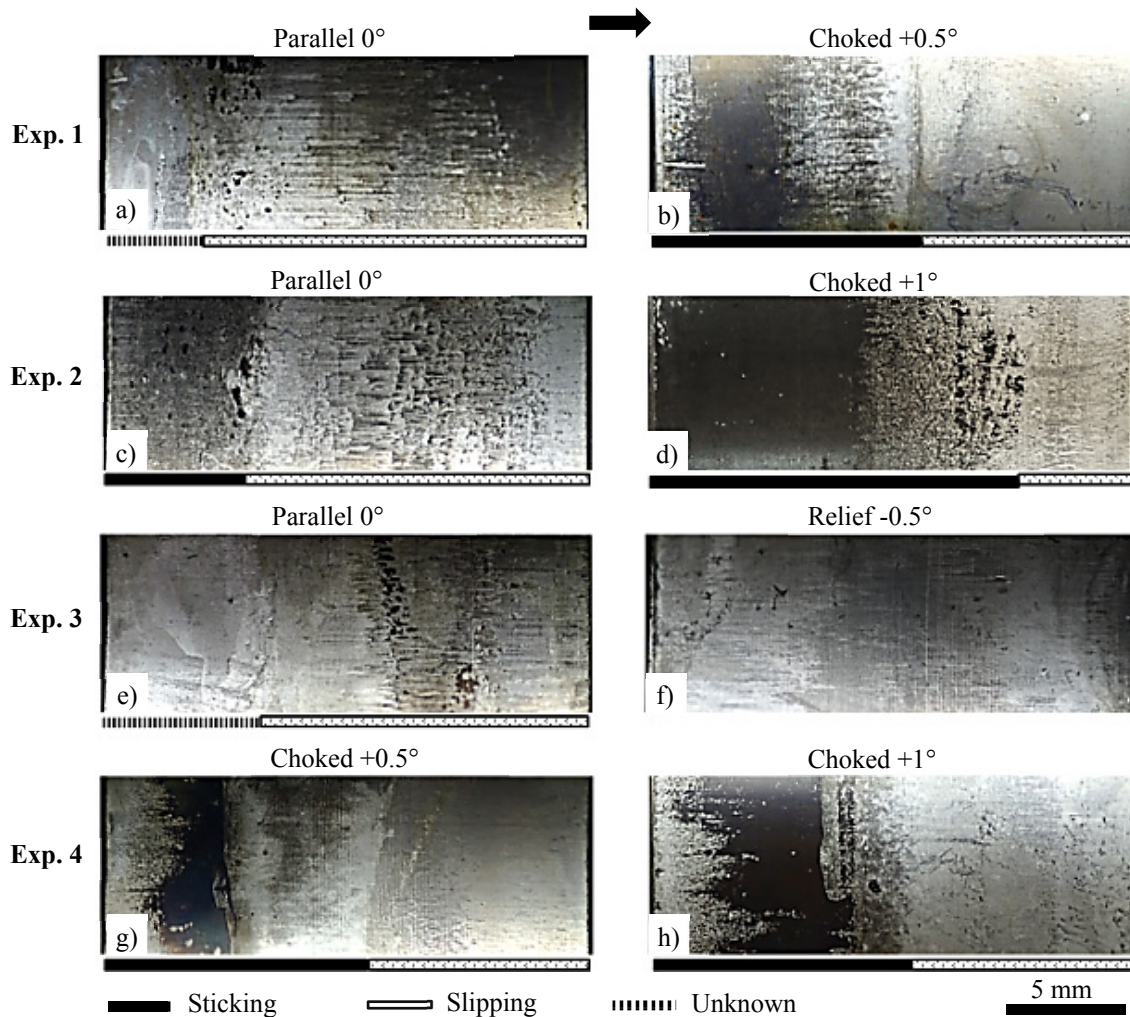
Surface of selected bearing channels after removal of aluminum rods.
